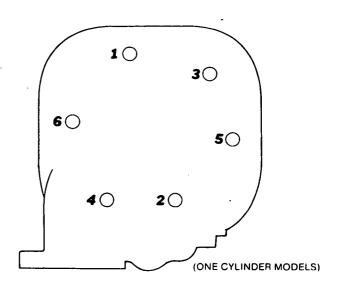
CYLINDER HEAD CAPSCREW TORQUE SEQUENCE
